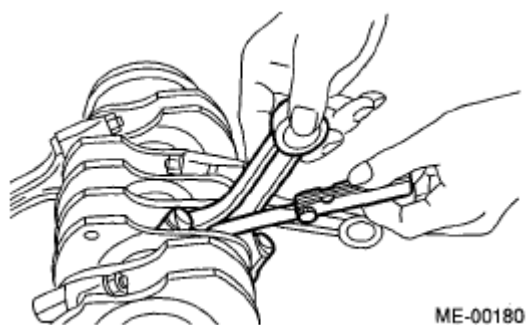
Measuring Thrust Clearance Using Thickness Gauge
